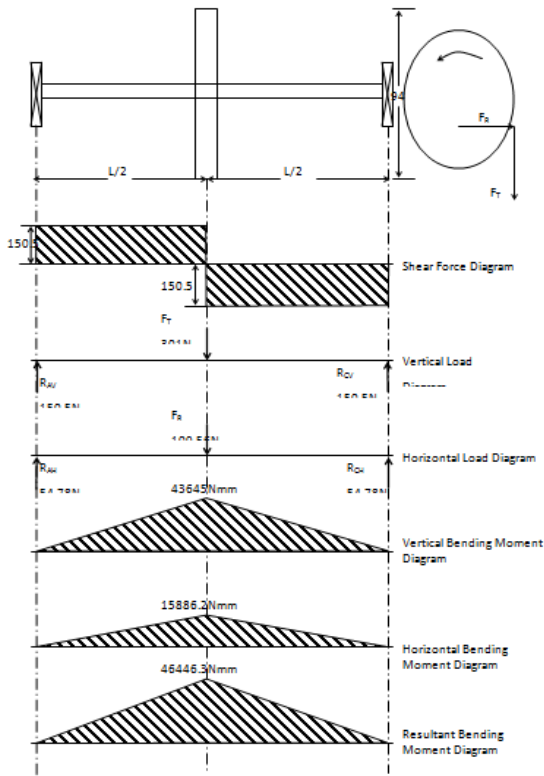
Sketch of load, stress and bending moments on the rotary barrel driven shaft
